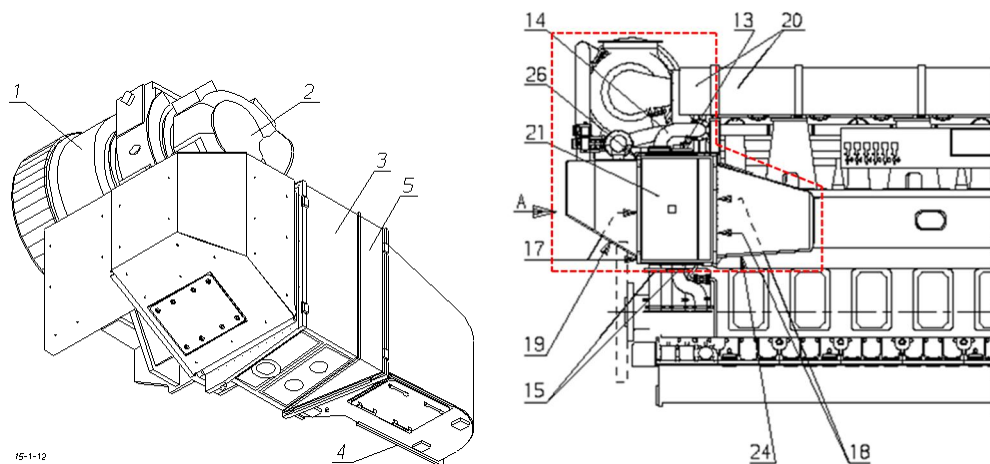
Turbocharging and air cooling module and location of the module on the engine /43, 15-0143-00/
